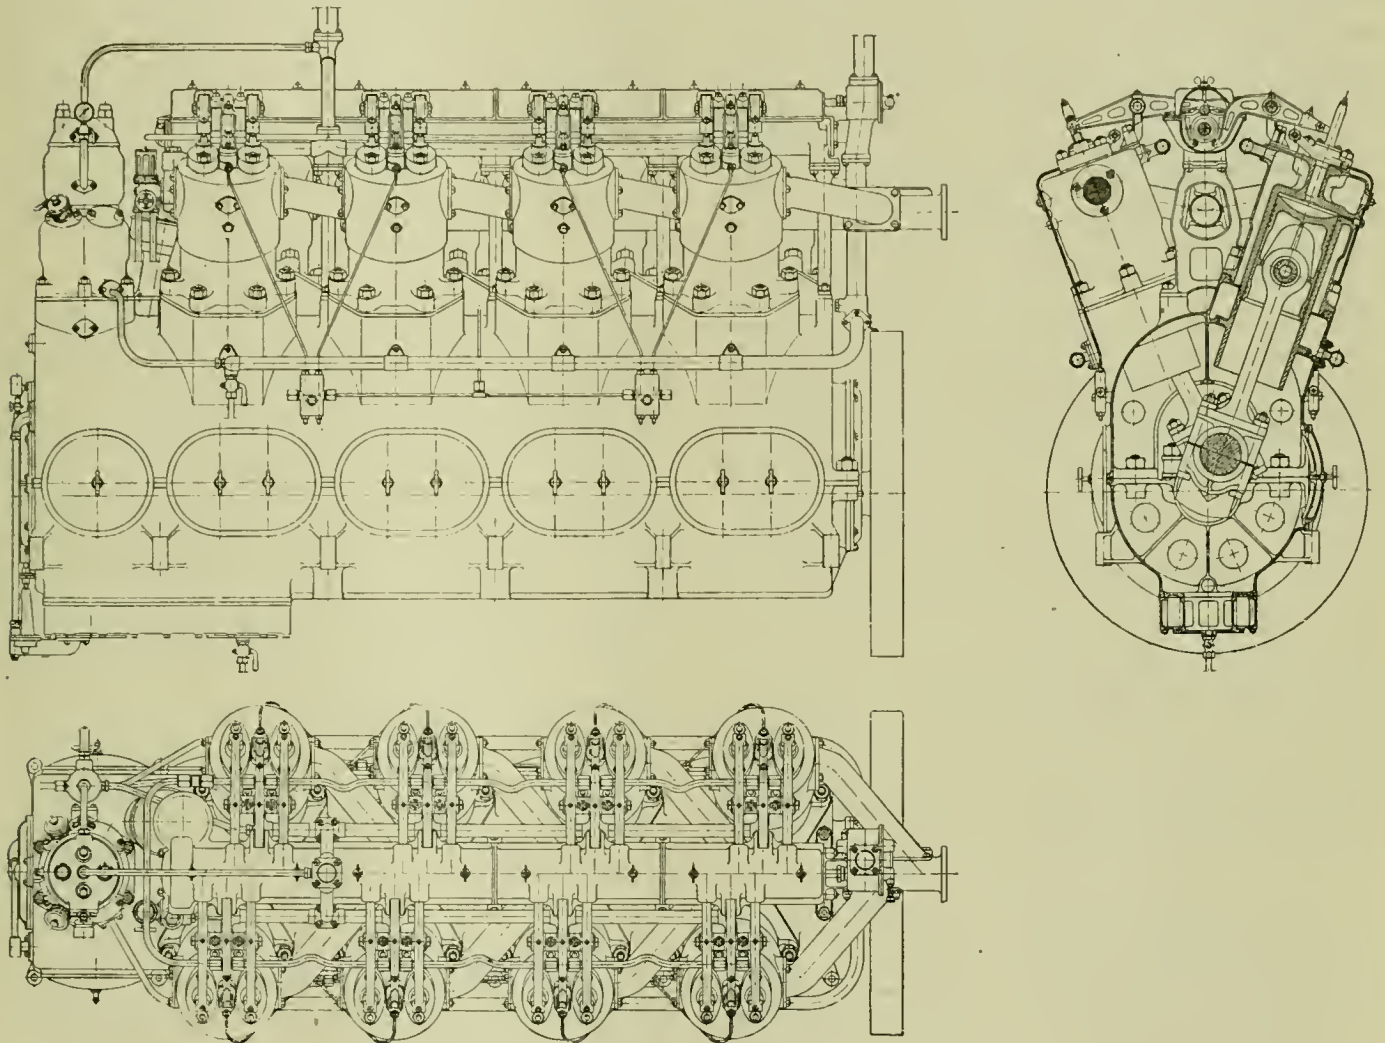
160 H.P. Diesel Engine Designed for Railway Service
